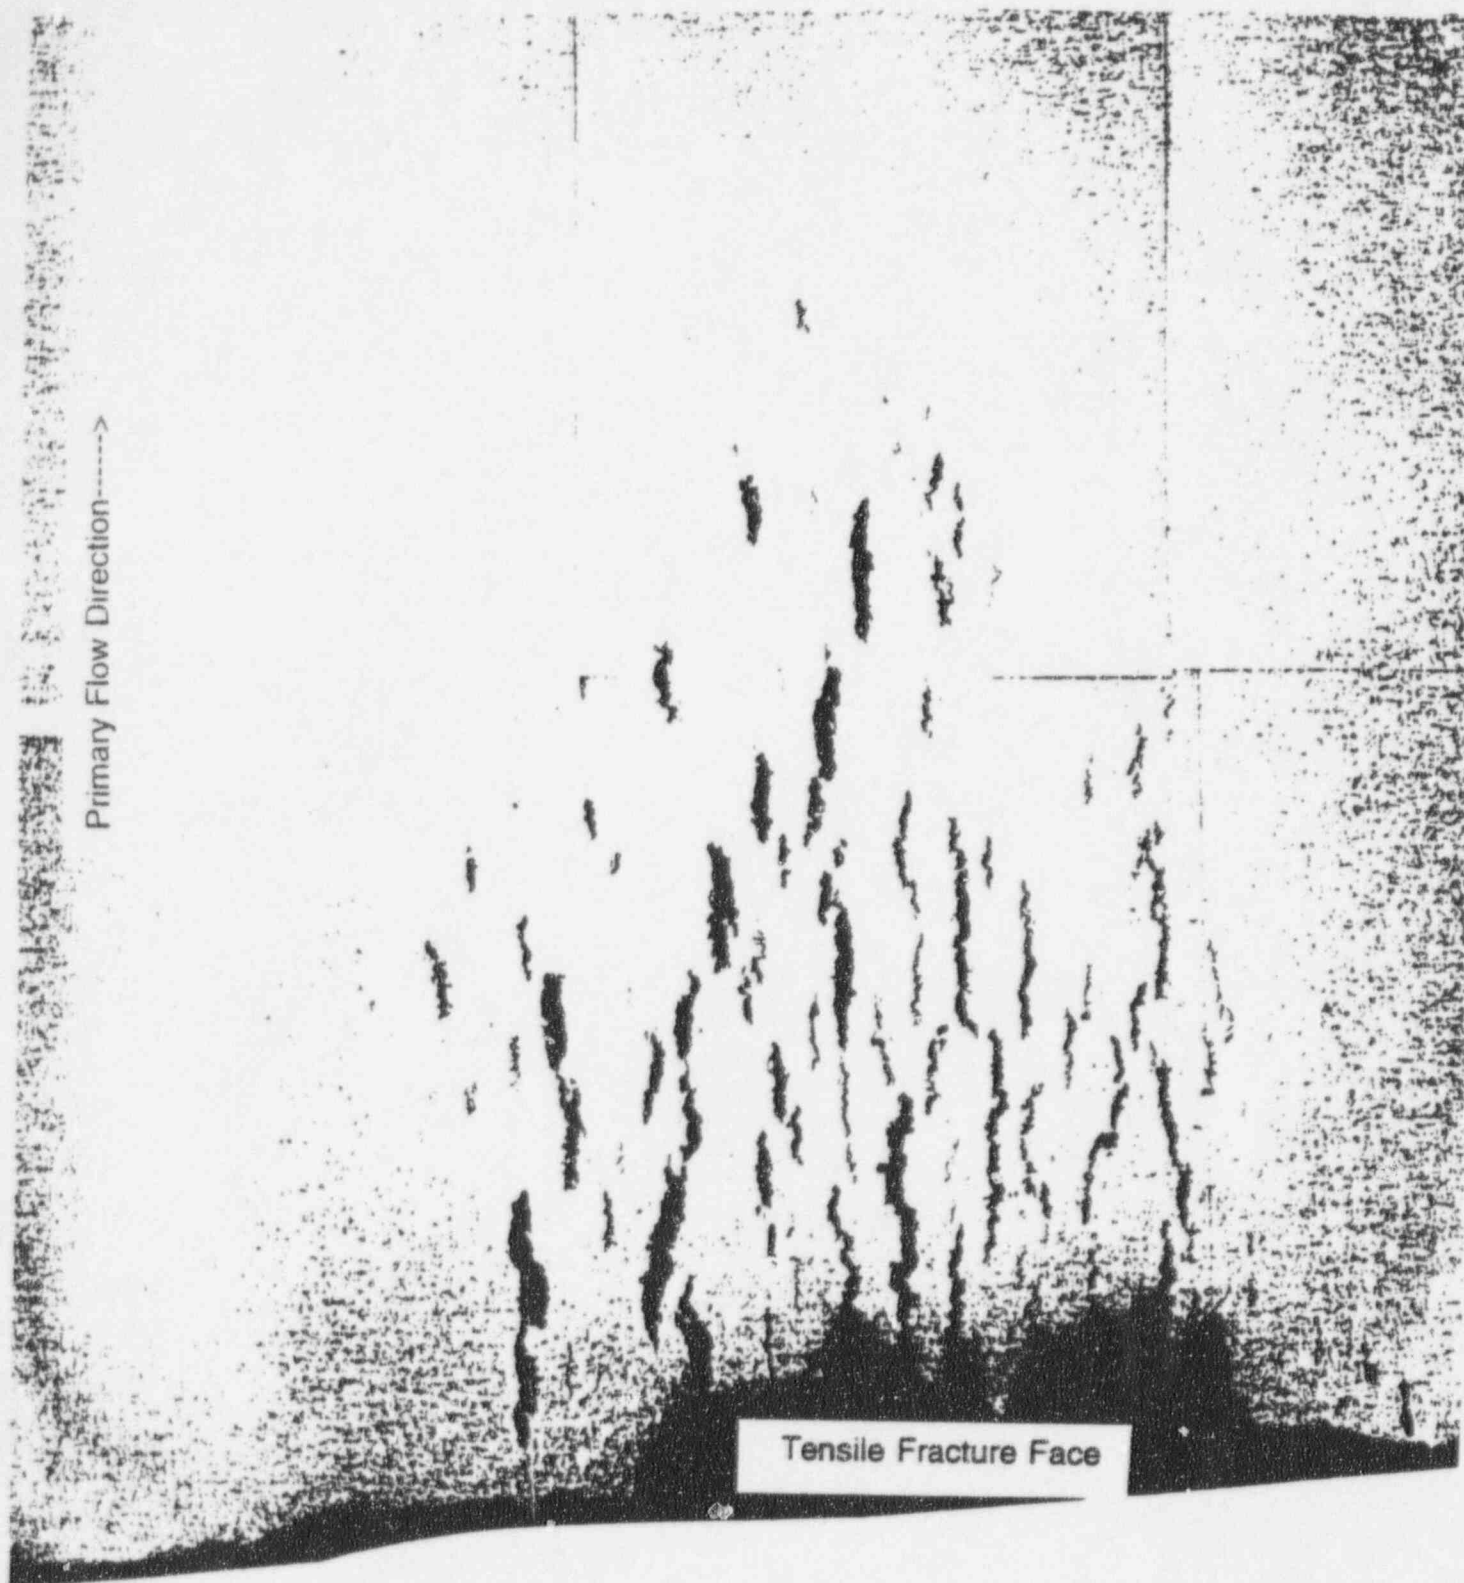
Radial metallographic section showing the TSP2 region of Tube R28C42 at a depth of 34% below the OD surface. Only axial intergranular corrosion is observed at the same location shown in Figure 3-12a (16X Mag.)
